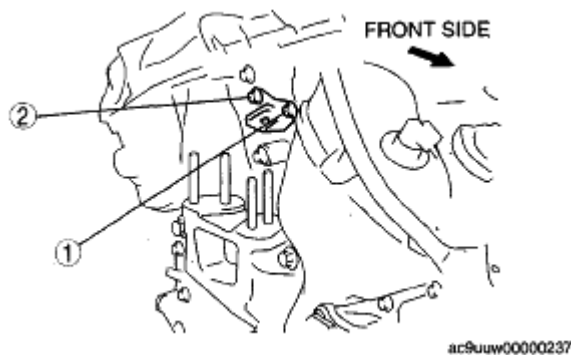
Identifying Engine External Components With Torque Specification
